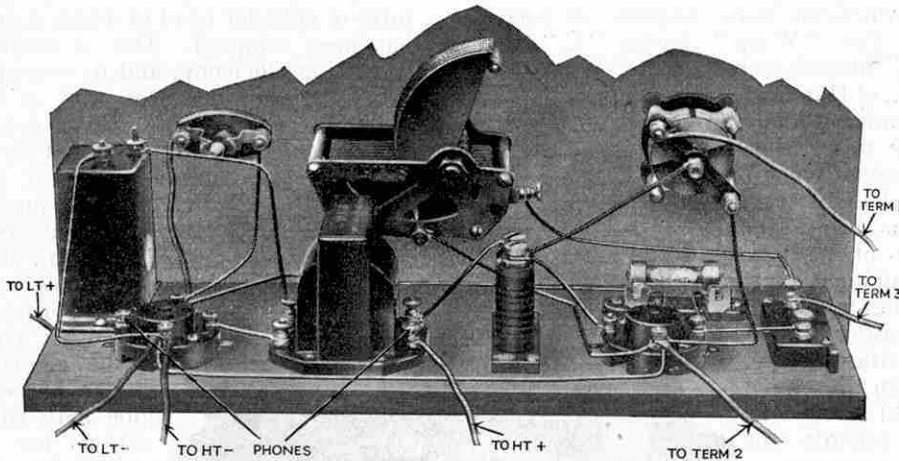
Front panel and baseboard removed from case showing the positions of the components and connecting wires.
